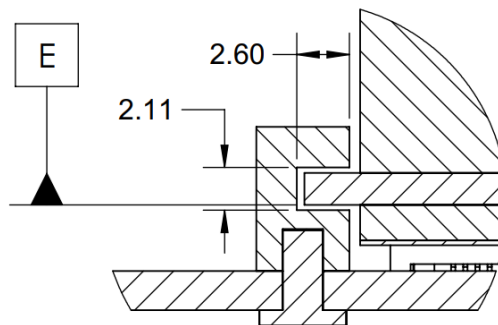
LFF Baseboard Chassis CTF Dimensions (Rail Guide View)
